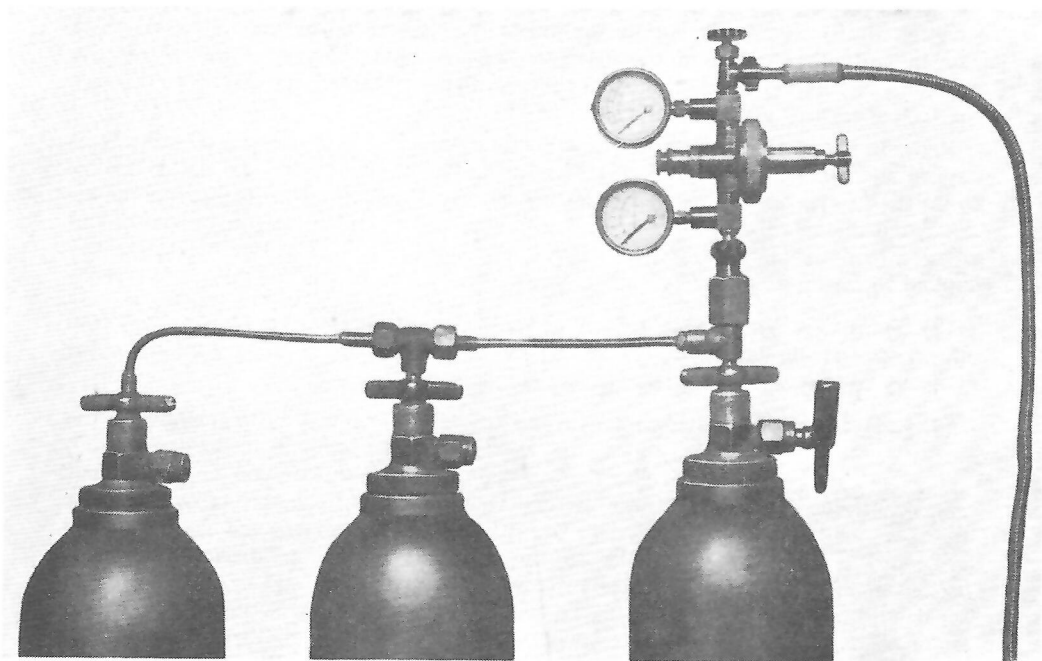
Oxygen cylinders with reducing valve, pressure gauges, etc.
